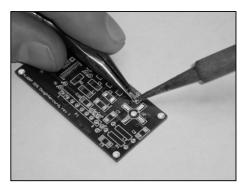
Attaching a Capacitor – Things get lots easier when attaching capacitors, resistors and other discrete components. Carefully hold the component in place and properly aligned using needle-nose pliers or tweezers and then solder one end of the component. Then reheat the joint while gently pushing down on the component with the pliers to ensure it is lying flat on the board. Finally, solder the other side of the component.
